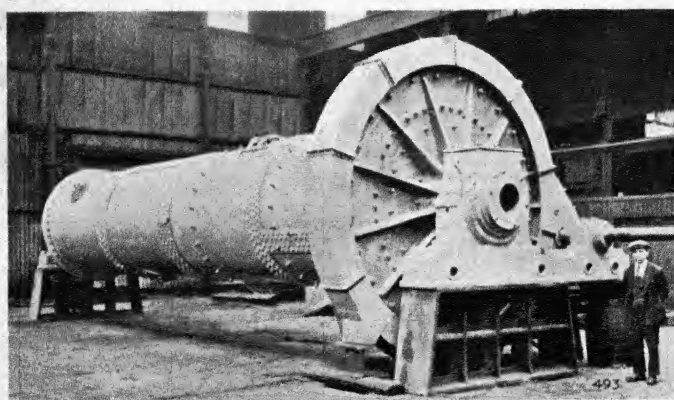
Combination tube mill by Edgar Allen & Co., Ltd.
